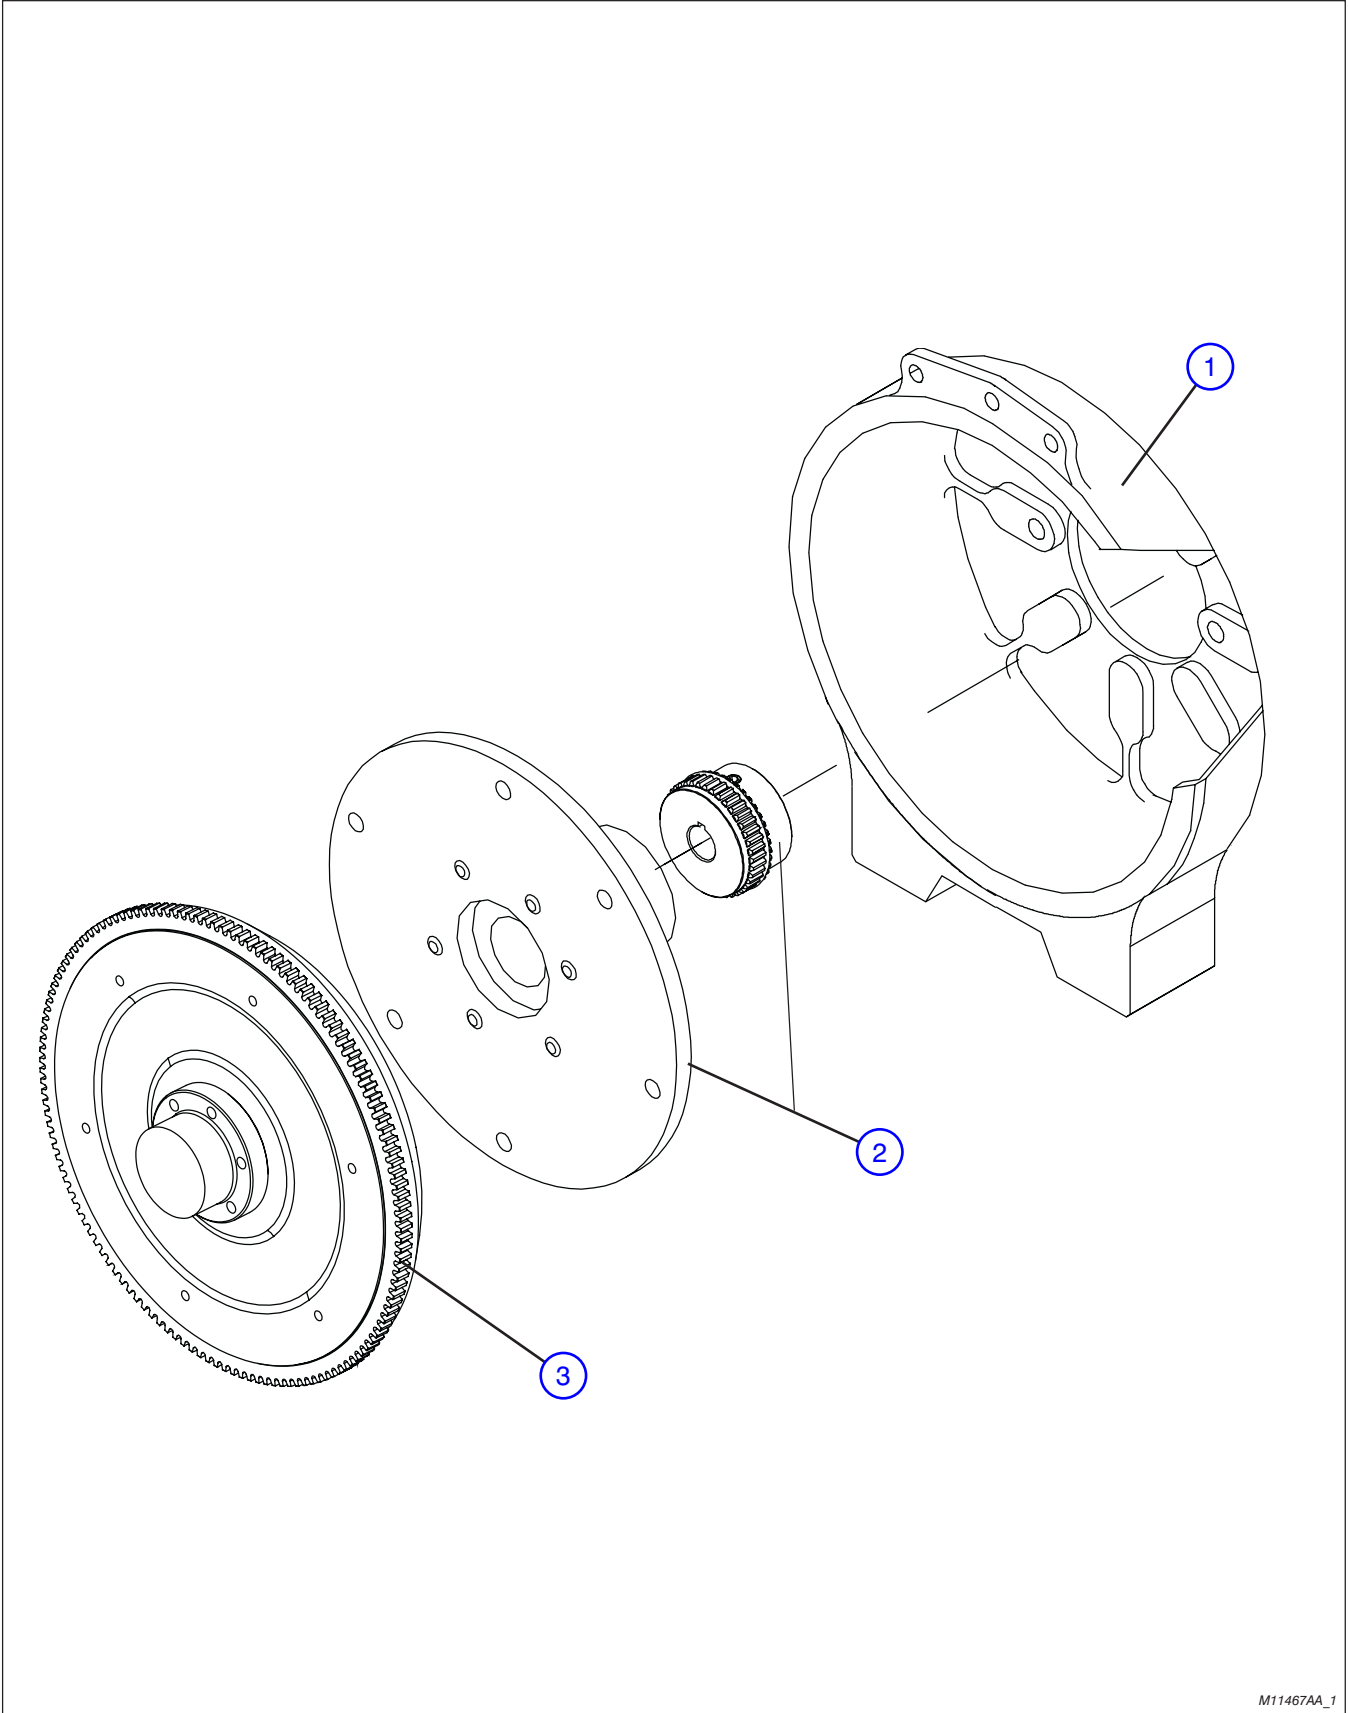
Dual Fuel Engine Assembly (Nissan Engine A15) (Continued)
